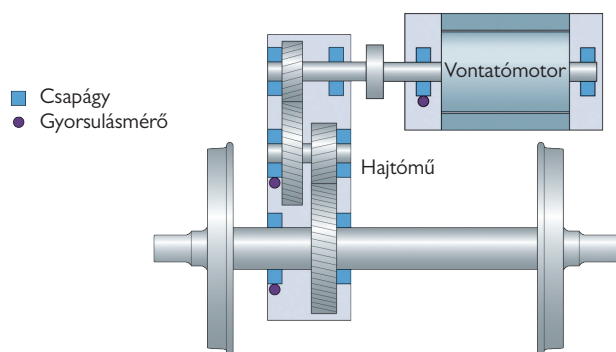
Sensorized hybrid traction motor bearing unit (TMBU)
